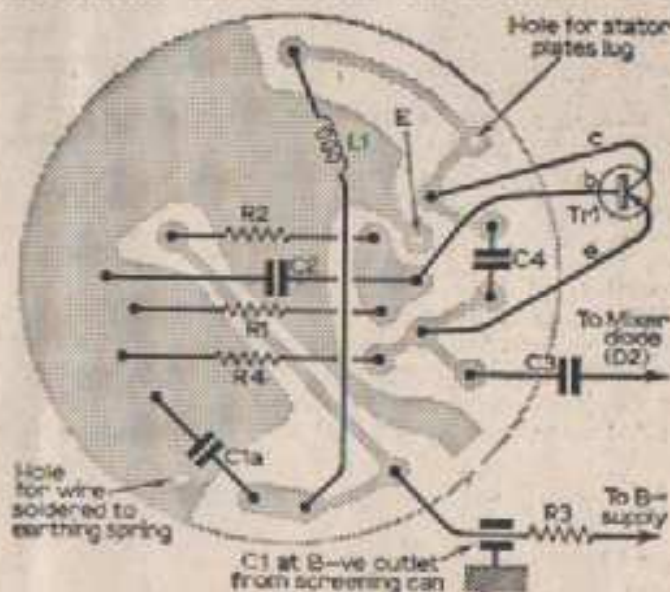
Printed circuit board and layout of components for Oscillator 2.
